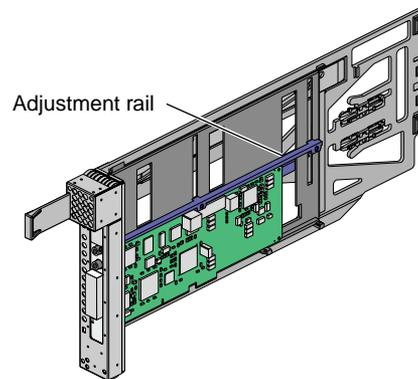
Moving Carrier Guide Bar to Secure Half-height Card
